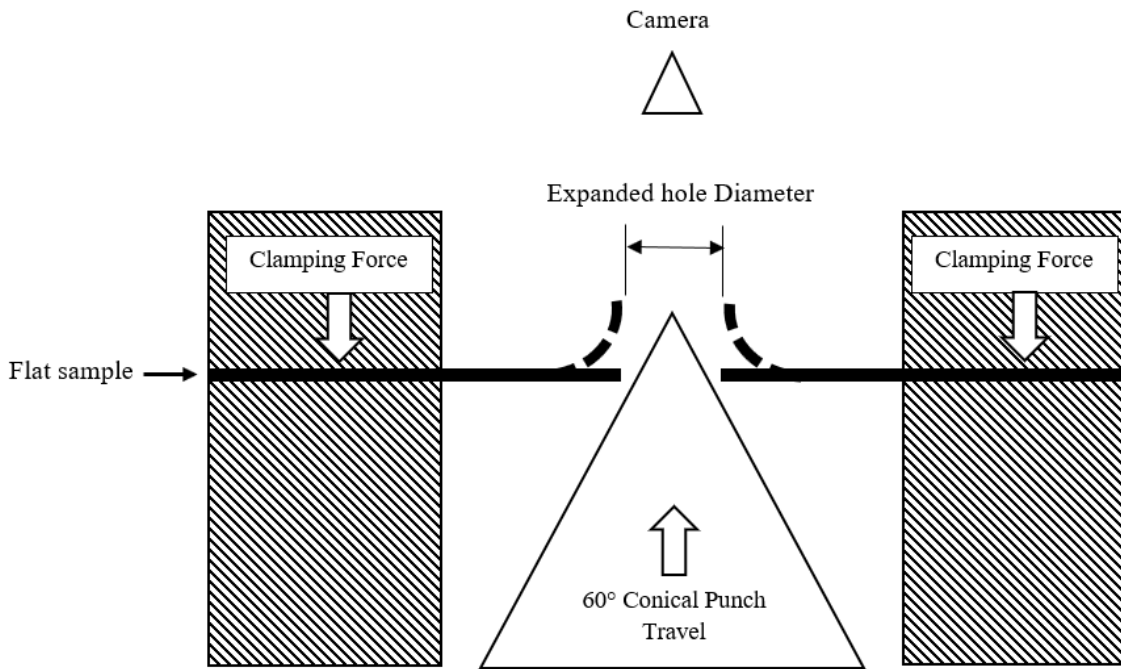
Cross-section of Hole Expansion Test Tooling
